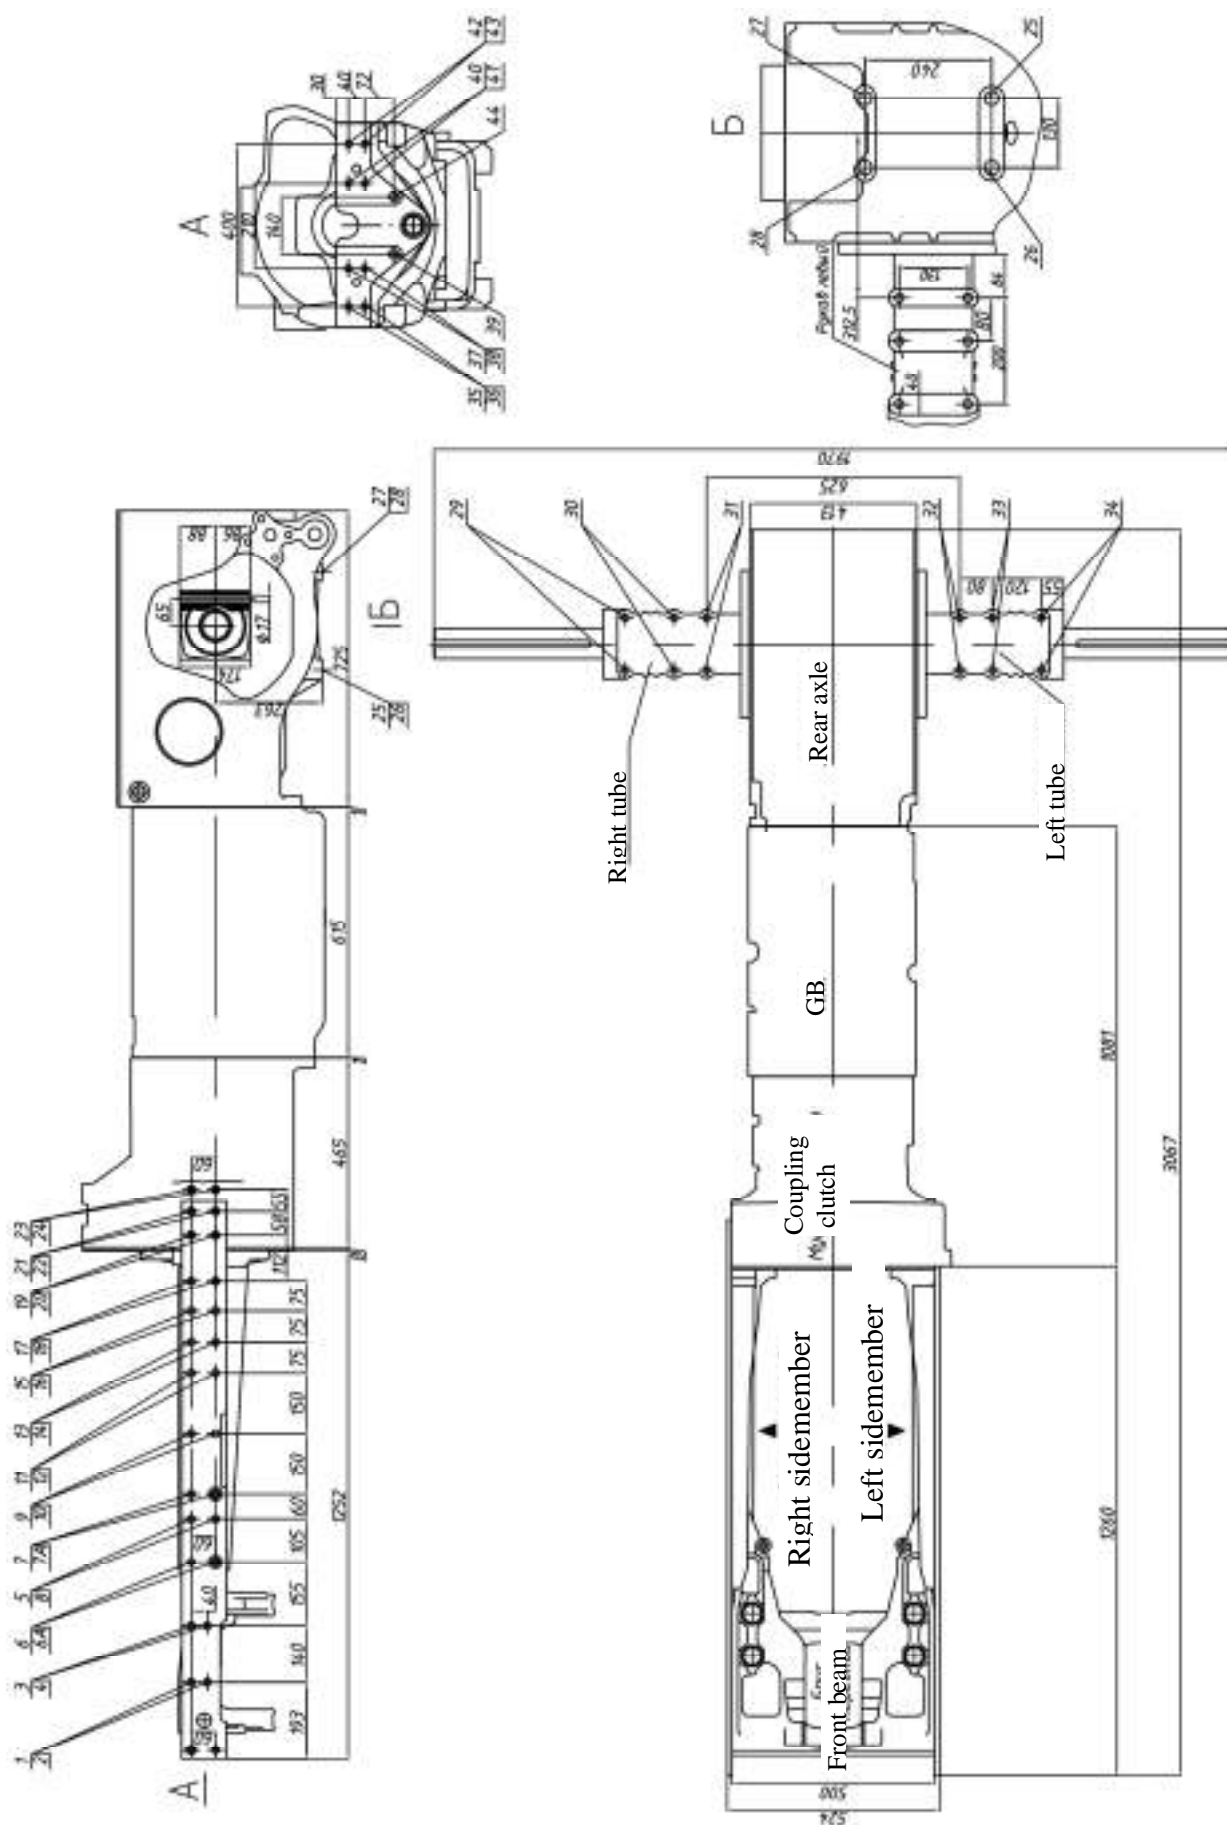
Mounting holes arrangement scheme for tractor BELARUS -1025.4
